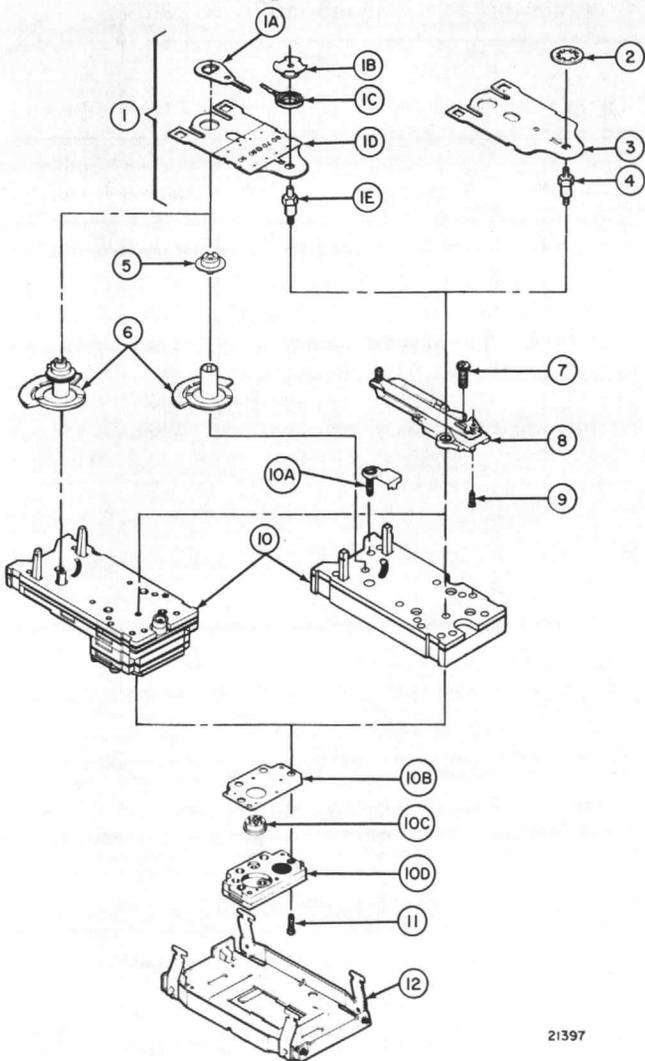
Single Element Thermostat Exploded View Showing Repair Parts and Assemblies.
